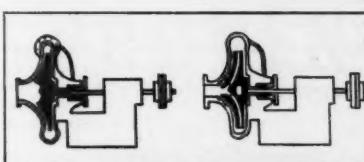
At left is an open impeller, side suction, single-stage pump. An enclosed impeller, side suction, single-stage pump is shown at right.
